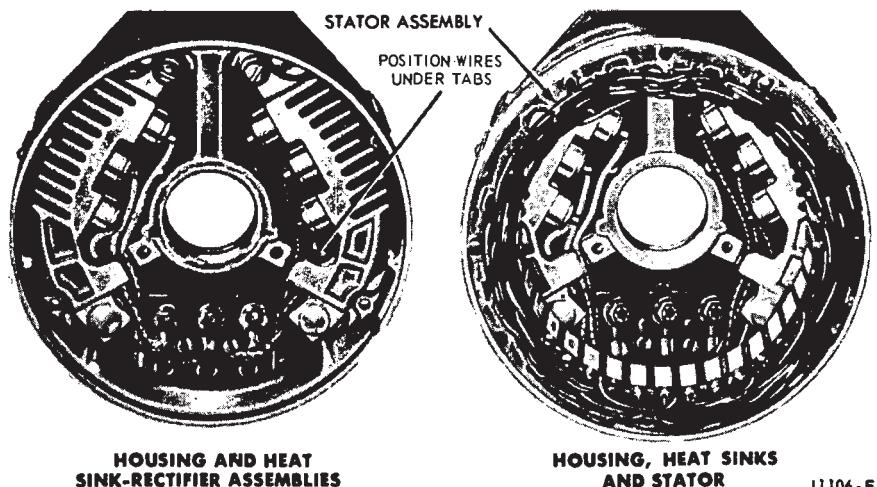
Rear Housing, Rectifier and Stator Assembly
